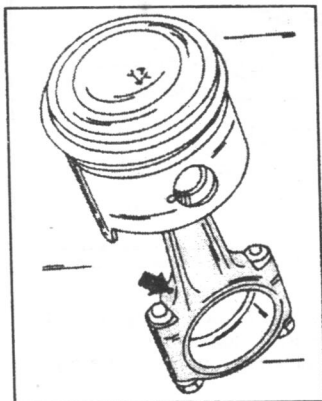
Correct assembly of pistons and connecting rods. The arrow in the piston crown and the oil splash hole must be on the same side.
